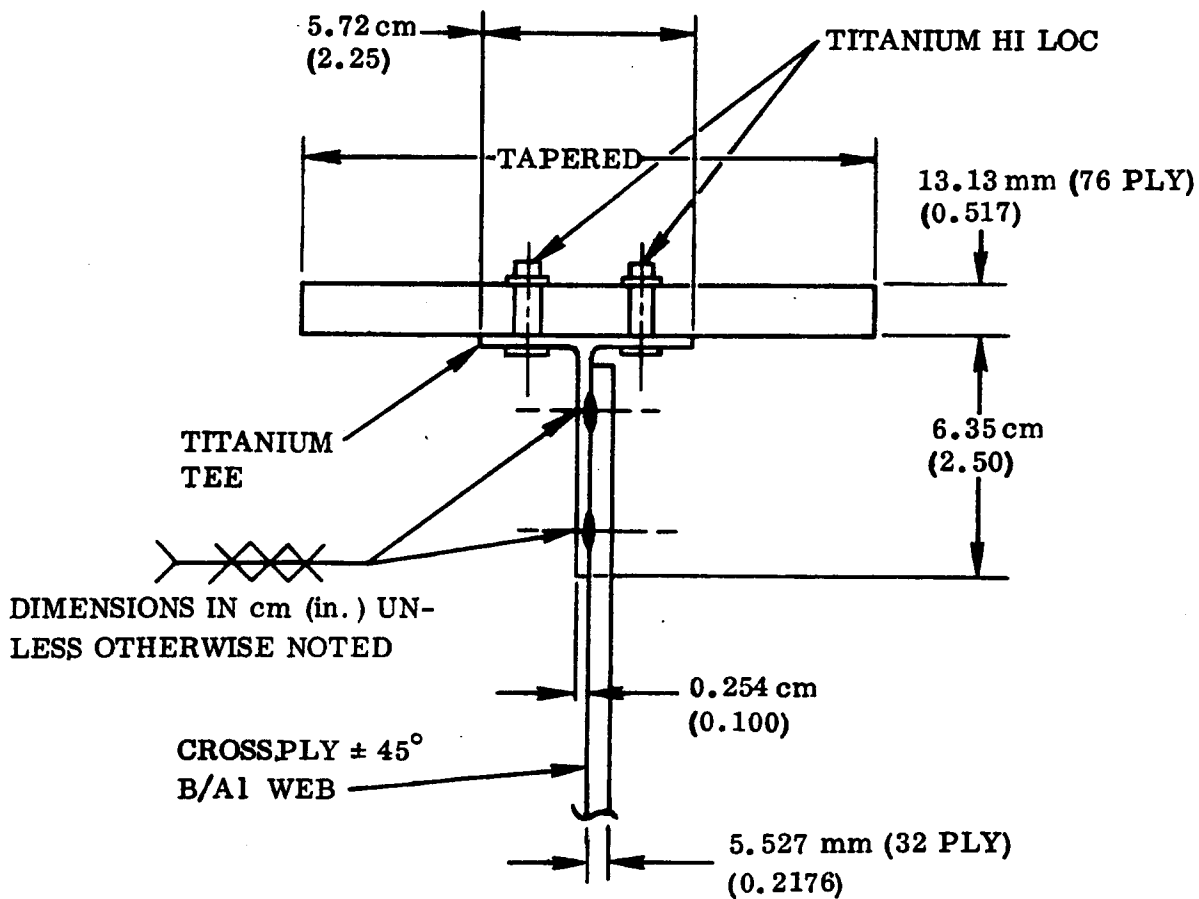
Shear Web Beam Compression Cap Cross-Section (Alternate Joint)
